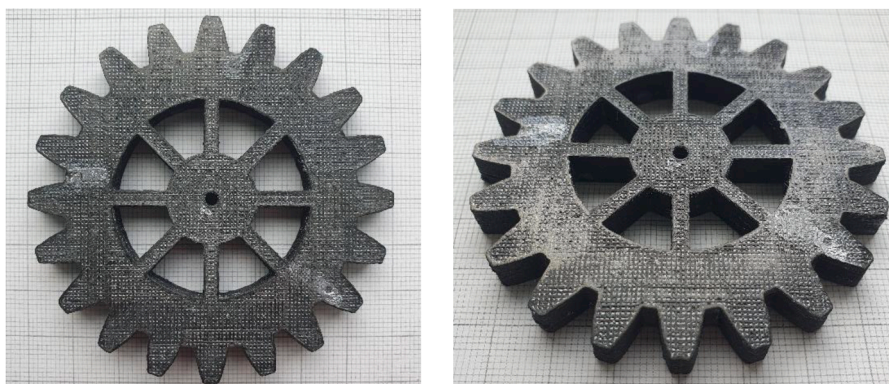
Final processed pre-oversized gear wheel placed on millimeter paper for better visualization of the geometry.
